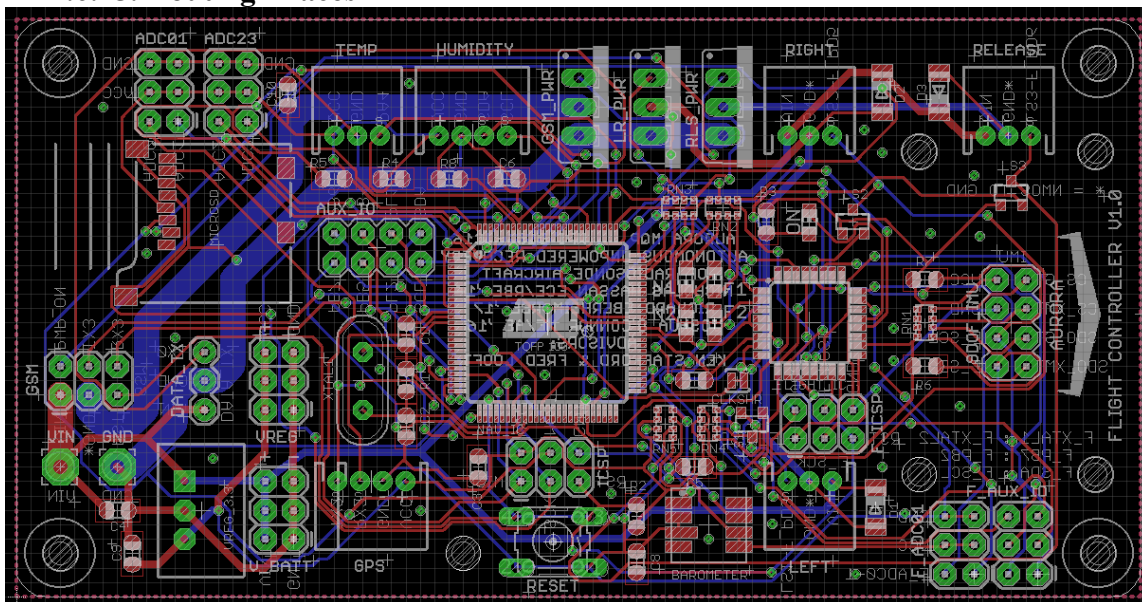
EAGLE Board View of Flight Controller PCB without Ground-Fill
